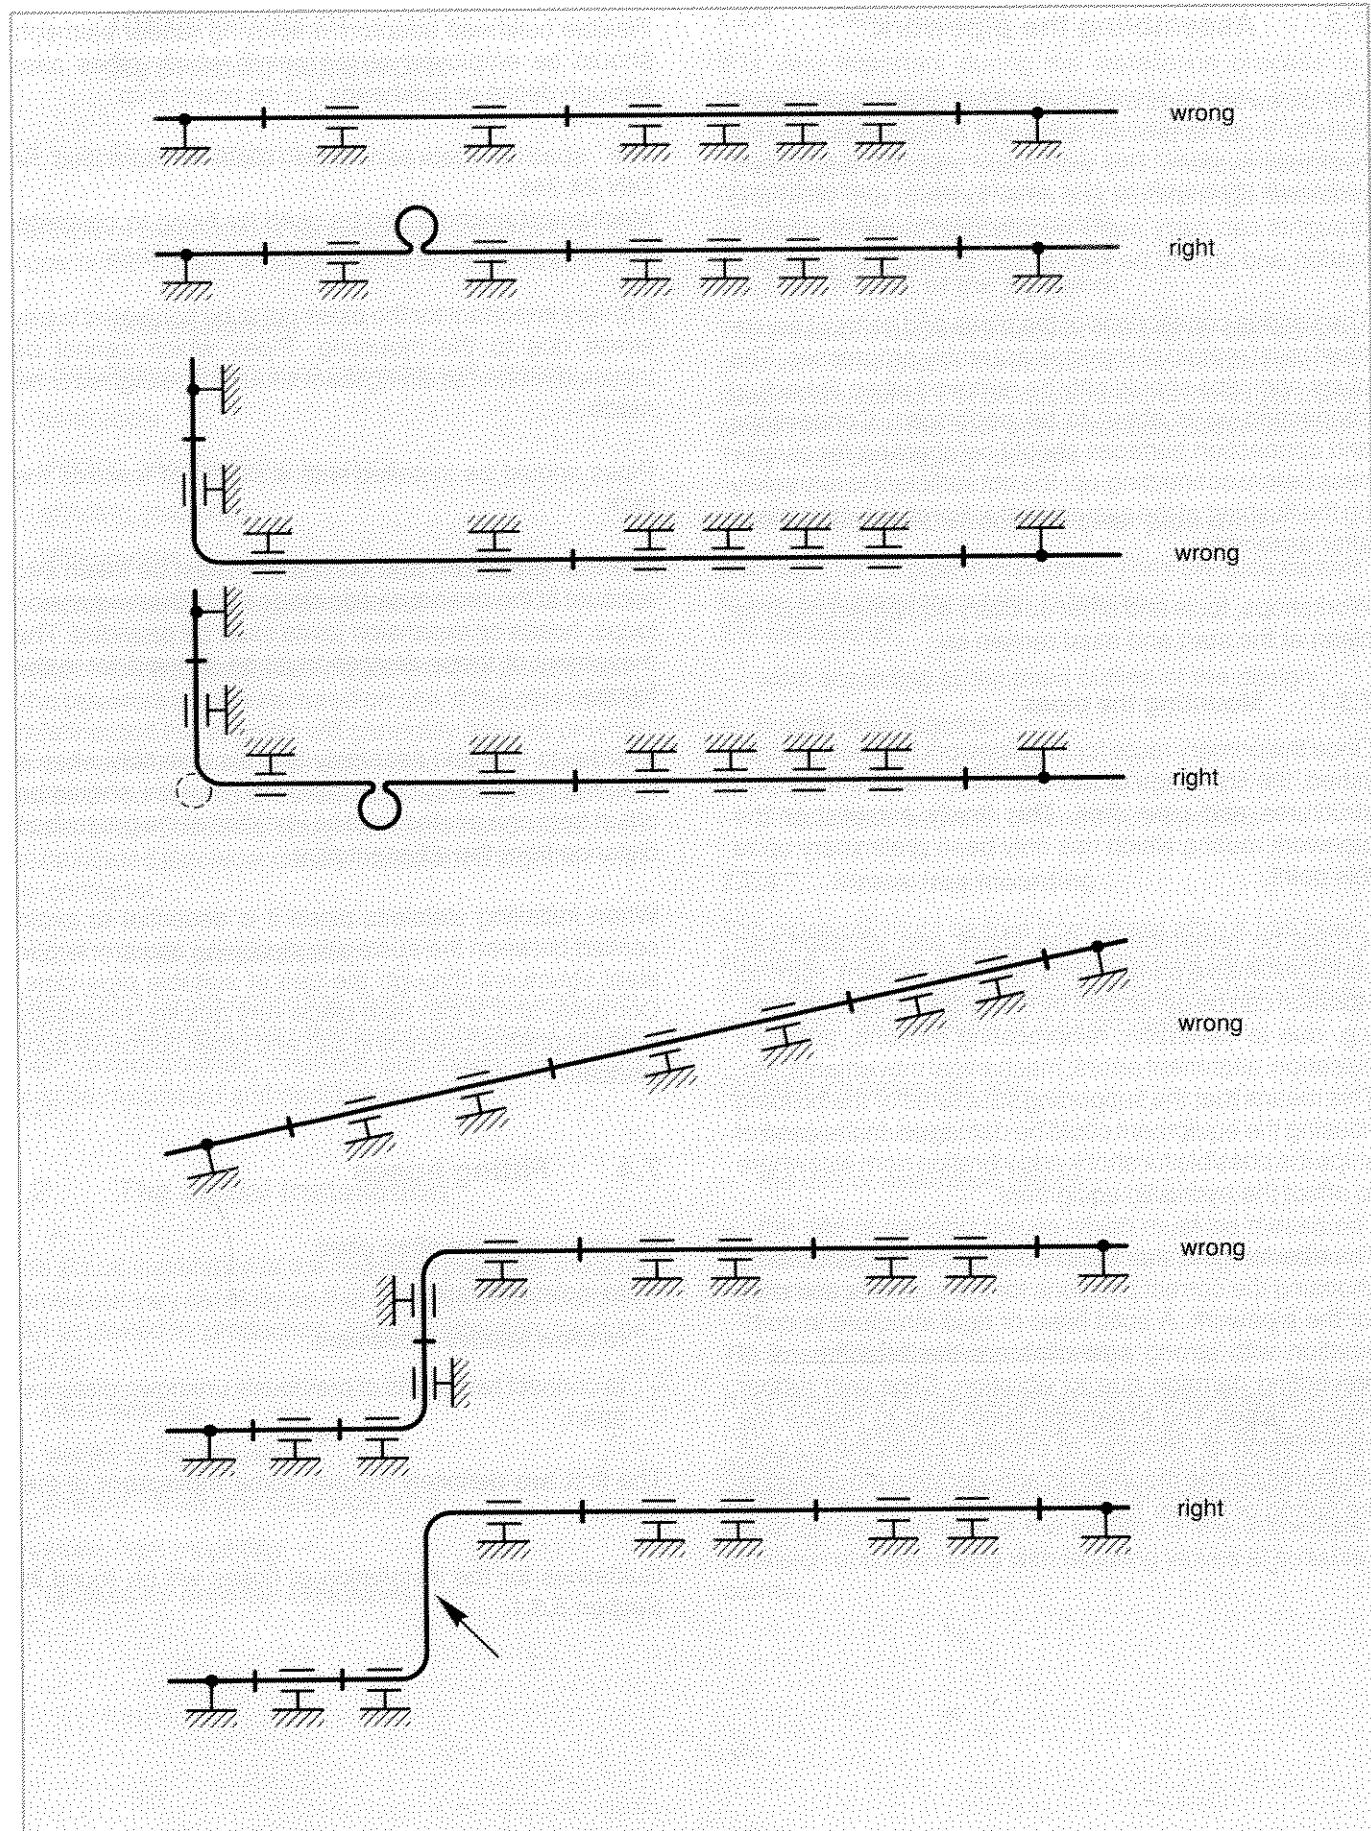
Examples of correctly and wrongly installed hydraulic pipelines
